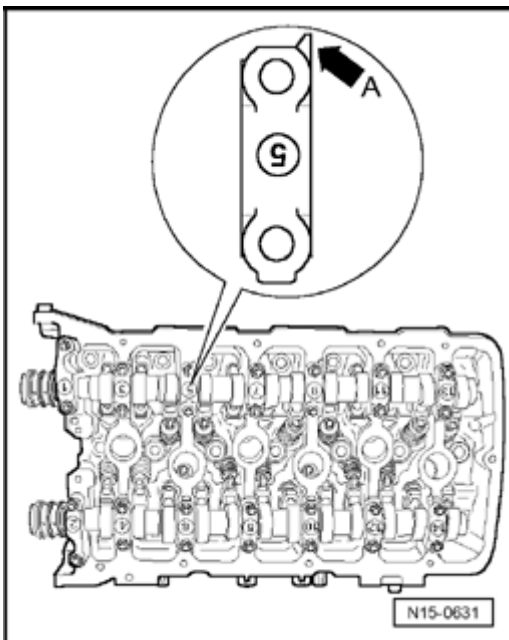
Installation Position Camshaft Bearing Caps, Cylinder Bank 1
